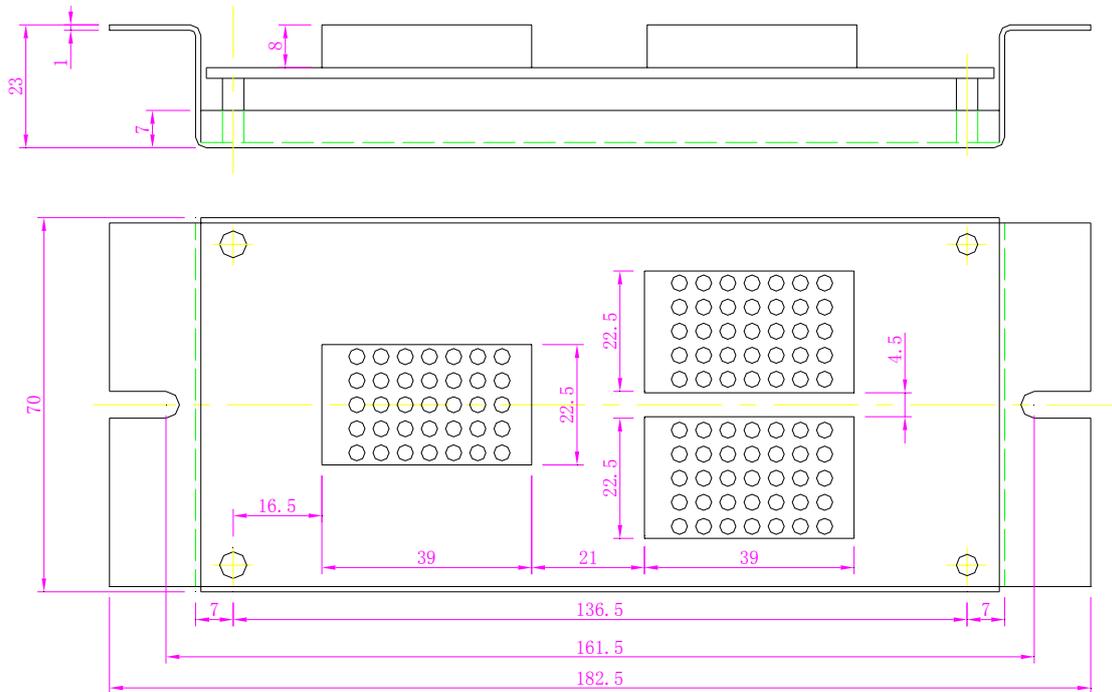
(B) Mounting Dimensions of SM-04-VRF
